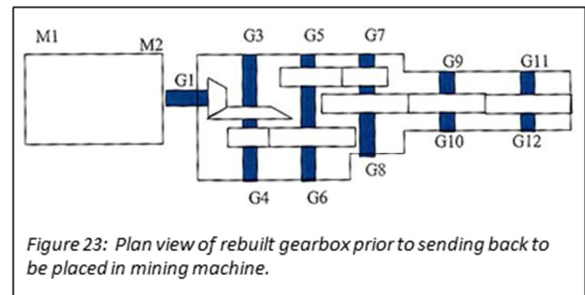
Plan view of rebuilt gearbox prior to sending back to be placed in mining machine.
